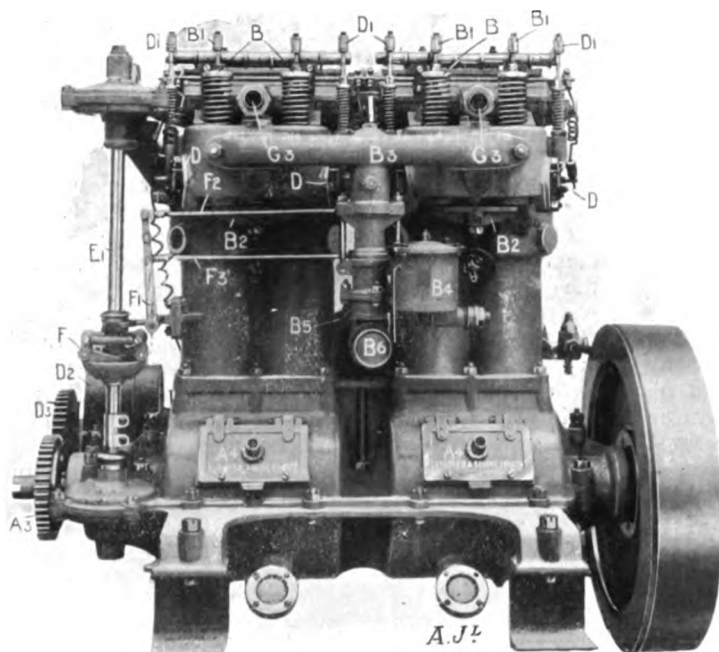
View of the 24-h.p. Straker-Squire Petrol Engine, from the left side, showing the Inlet-Valves, Igniters, and the Carburettor.
